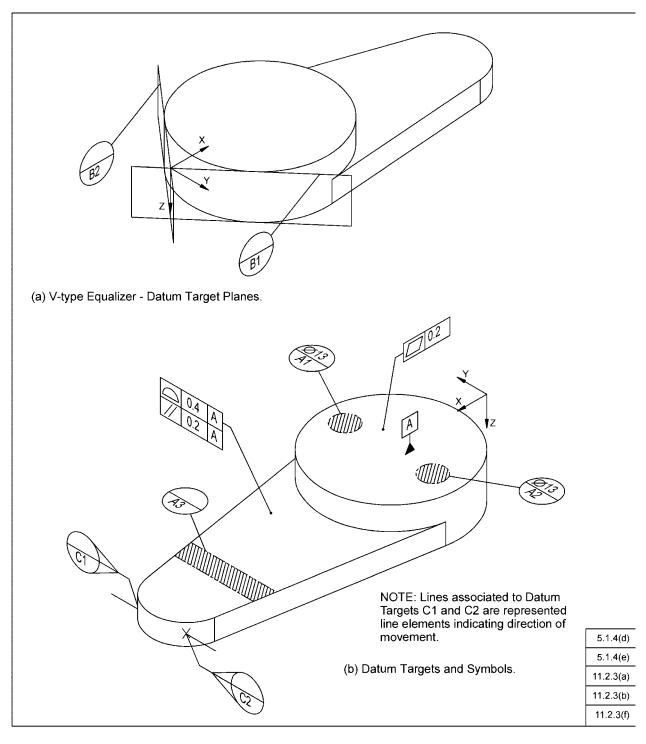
Datum Targets and Symbols Attachment
